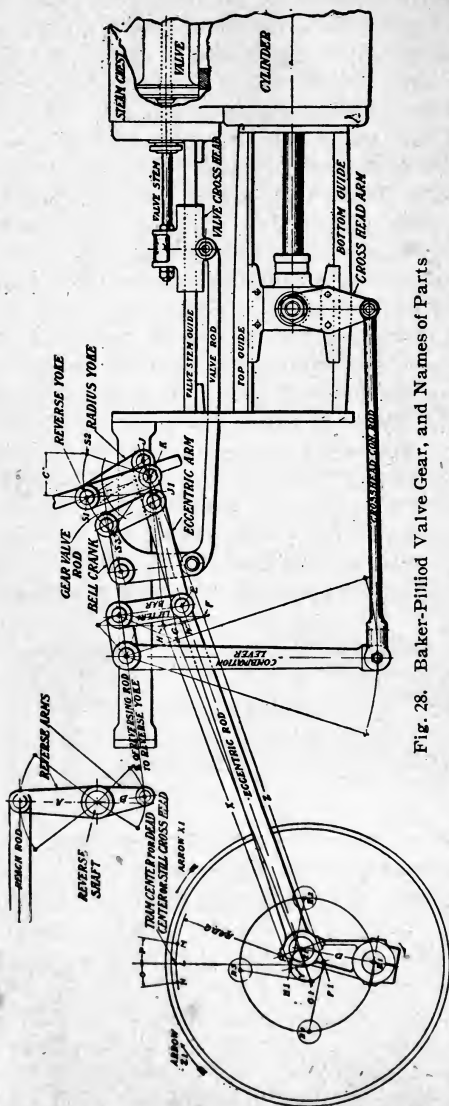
Baker-Pilliod Valve Gear, and Names of Parts
